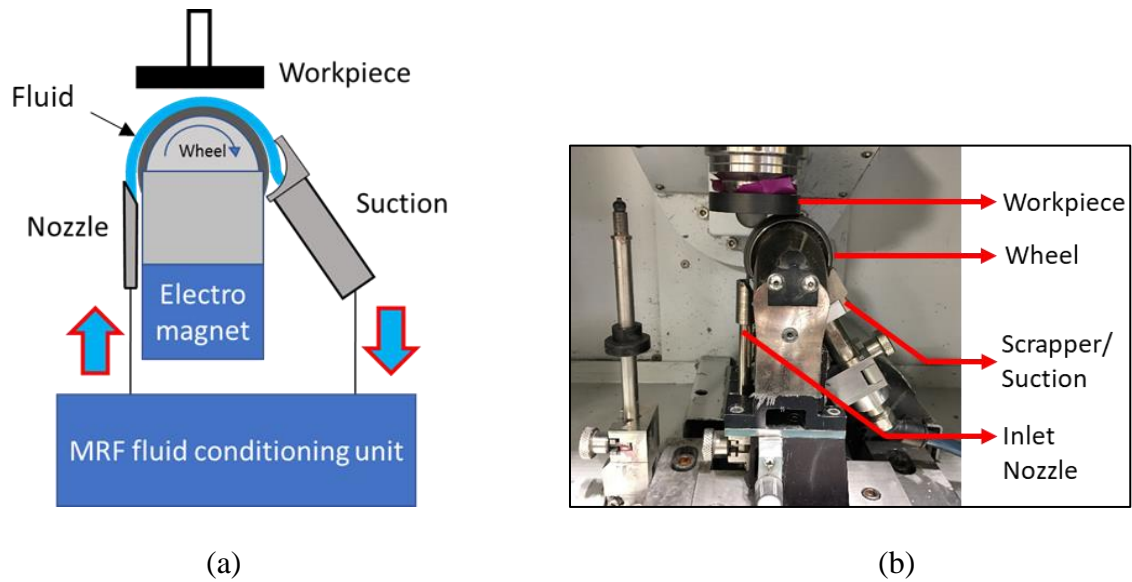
(a) Basic components of MRF machine and MRF polishing process (modified from [45]) (b) QED Q22 – XE CNC MRF machine
